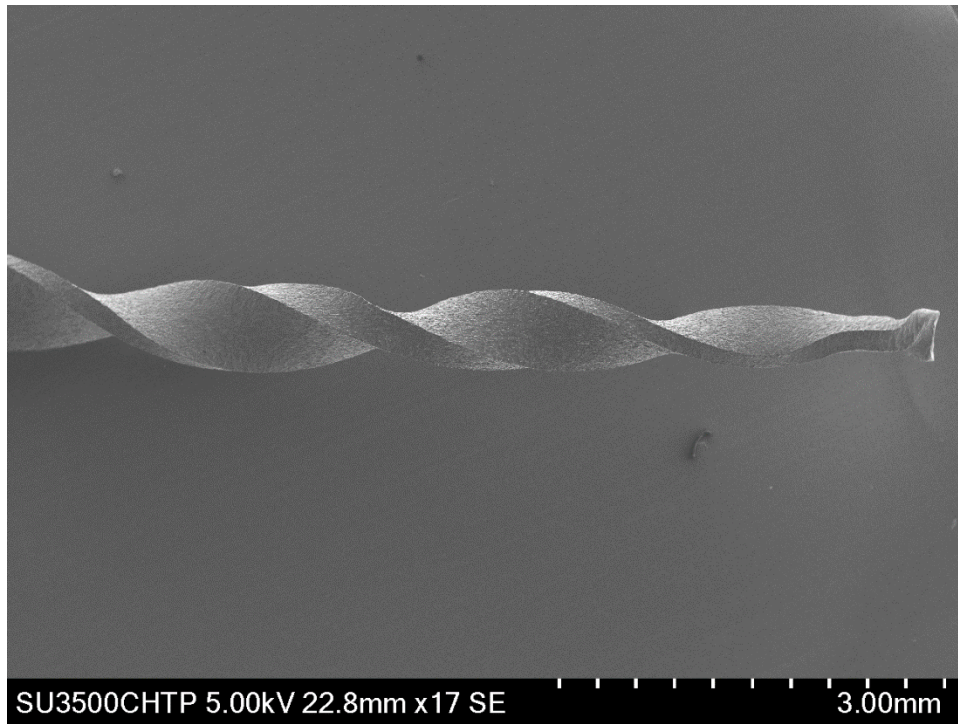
Unwinding of a HyFlex EDM file after pure torsional fracture.
